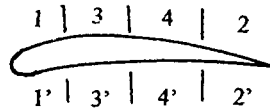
Process of thermal spray welding of runner blades
